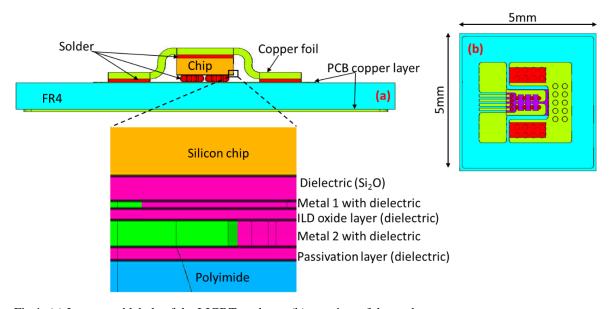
(a) Layers and labels of the LIGBT package, (b) top view of the package
